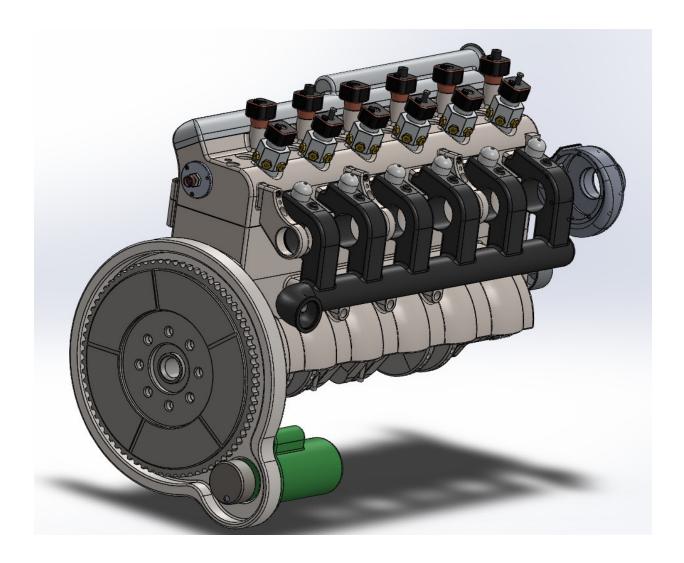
I6 engine turbines and compressor assembly. 105 mm compressor DIA. 730 mm OAL.
